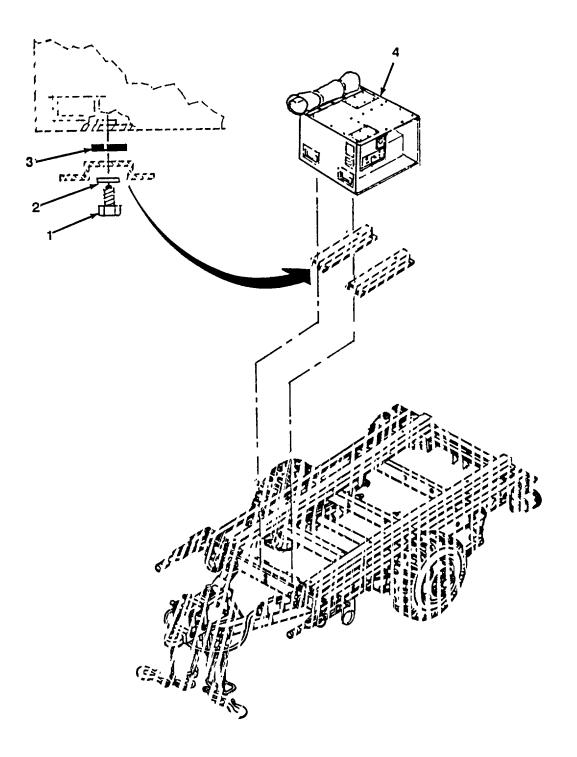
Air Conditioner and Mounting Rails (Sheet 1 of 2)
